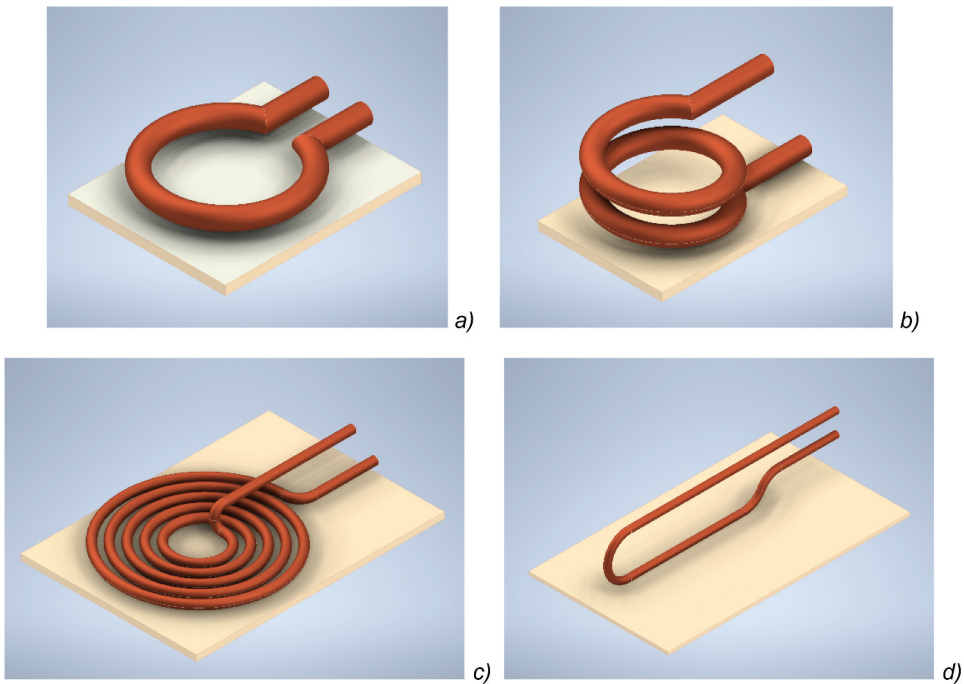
Different coil types: circular coil (a); circular coil with more windings (b); pancake coil (c); linear coil (d).
